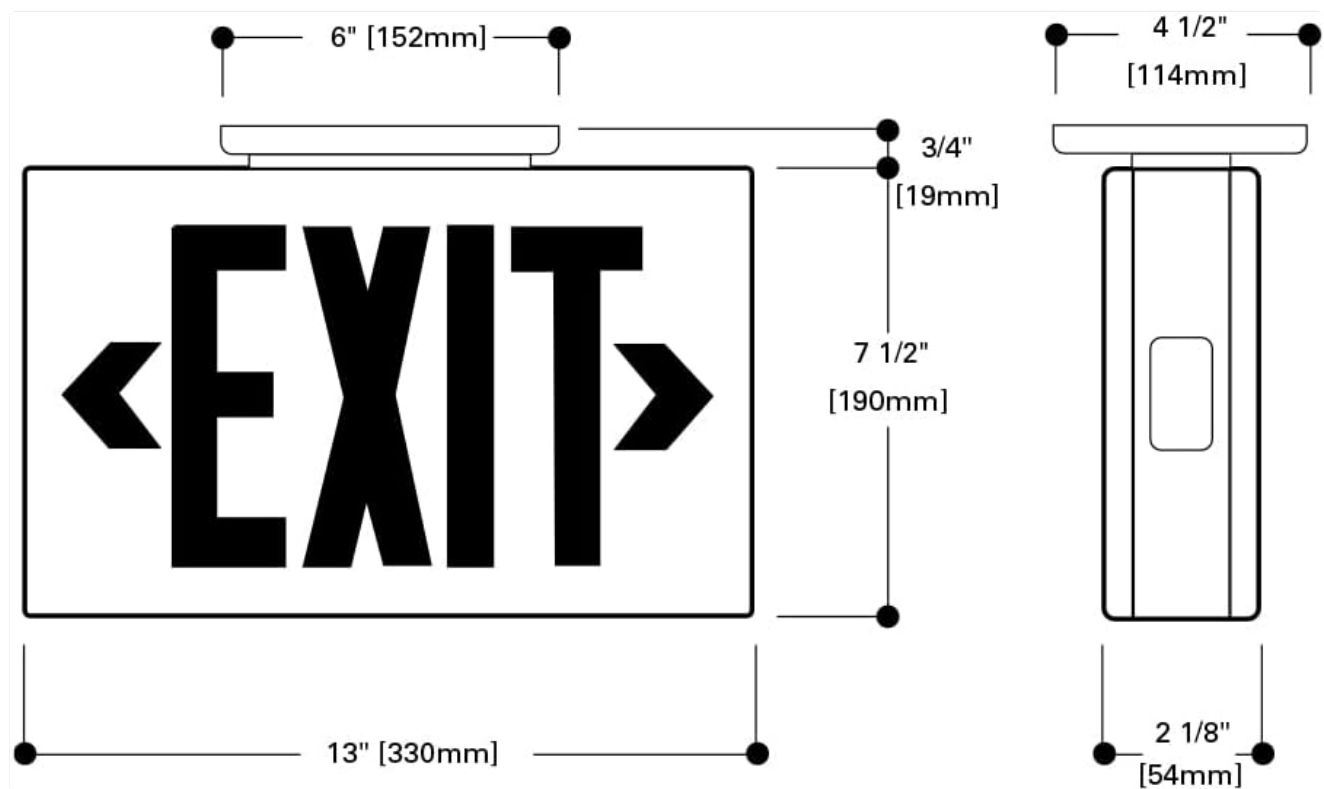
Dimensional drawing of the LPX7 exit light, showing overall width of 13 inches (330mm), overall height of 7 1/2 inches (190mm), and overall depth of 2 1/8 inches (54mm).
